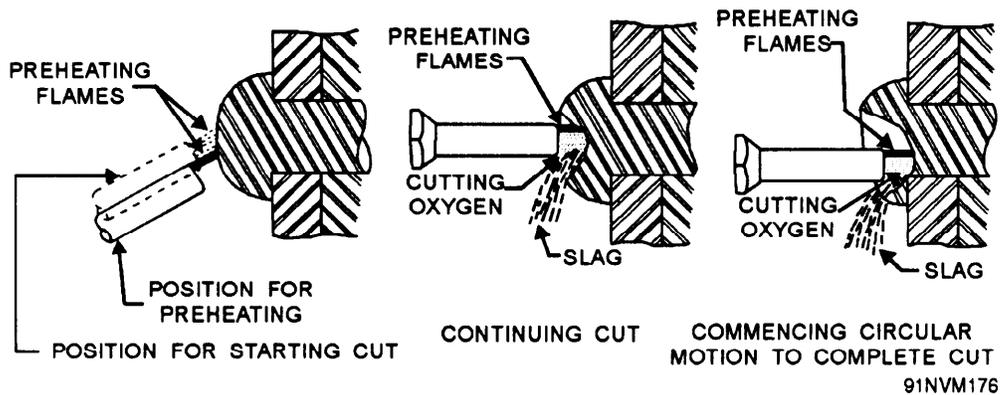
Cutting buttonhead rivets with a low-velocity cutting tip.
